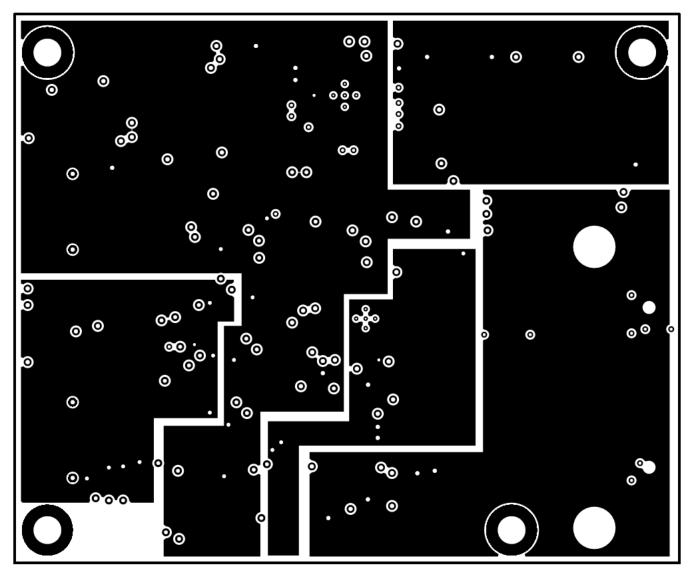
ADS8920BEVM PCB Layer 3: Power Planes
